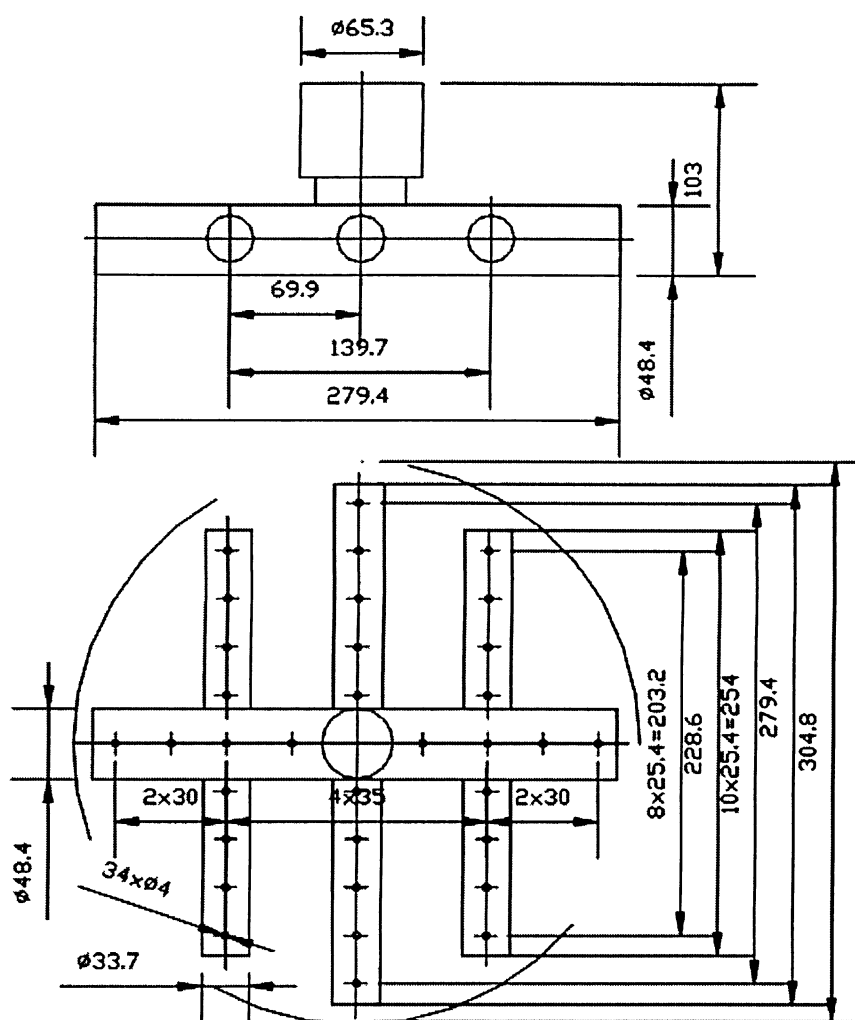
Ladder-type liquid distributor (LLD) layout.
